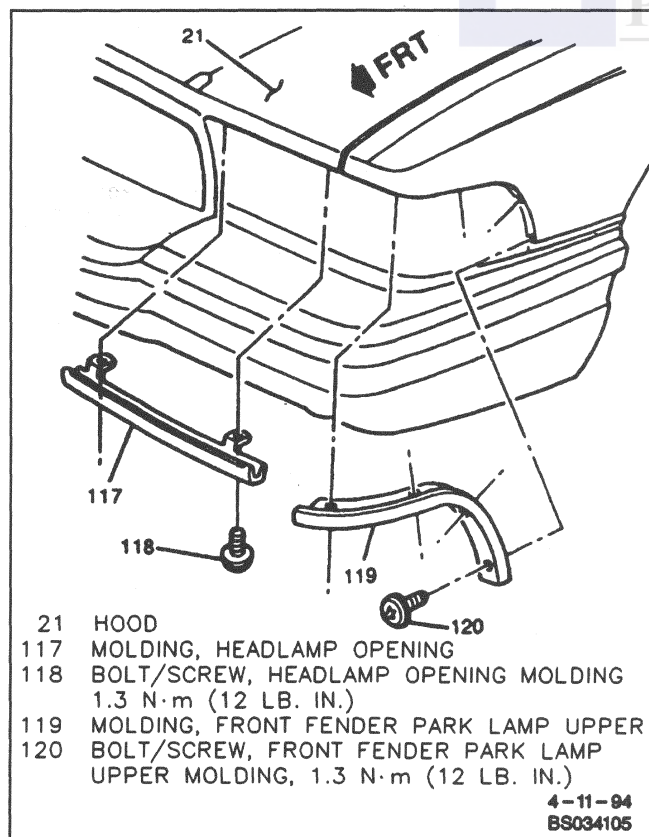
Front Fender Park Lamp Upper Molding-(Buick Sedan)
